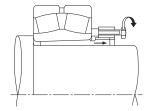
Removal of Withdrawal Sleeve Using Withdrawal Nut (2)
